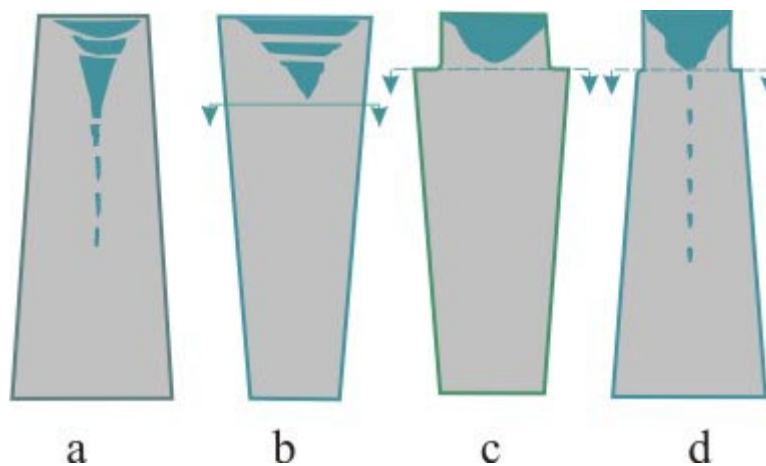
(a) Narrow end up mould showing long pipe in killed steel
